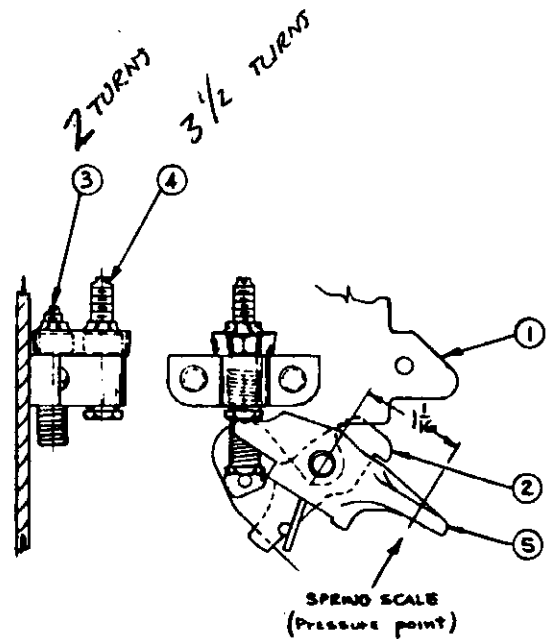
Latch Engagement and Tripper Bar Latch Engagement Adjustment
